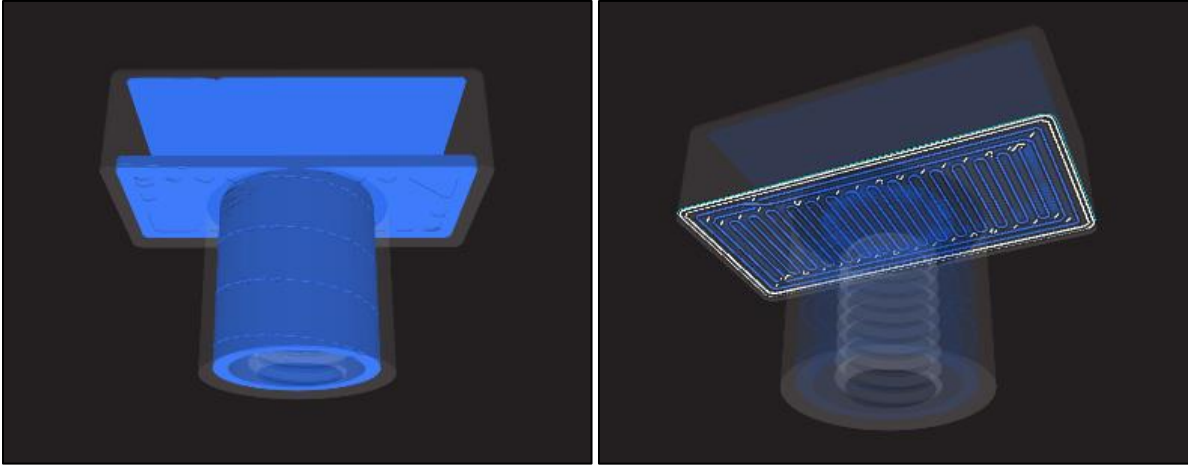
Custom 3D Printed Push Button Prototype illustrating Filament Layout
